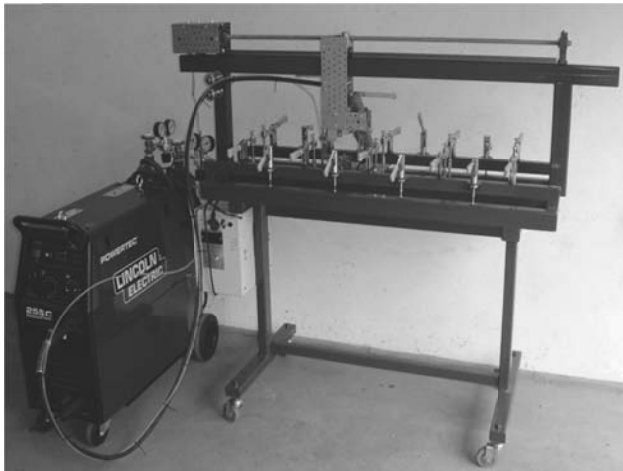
Stand for welding with micro-jet cooling of weld
